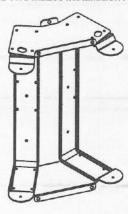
Two Enclosure Horizontal Array Using the Mb300 Horizontal Array Kit
